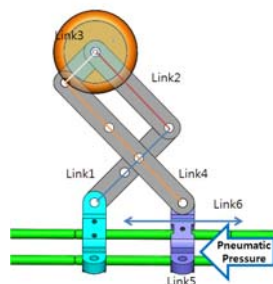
6-link sliding mechanism using pneumatic pressure
